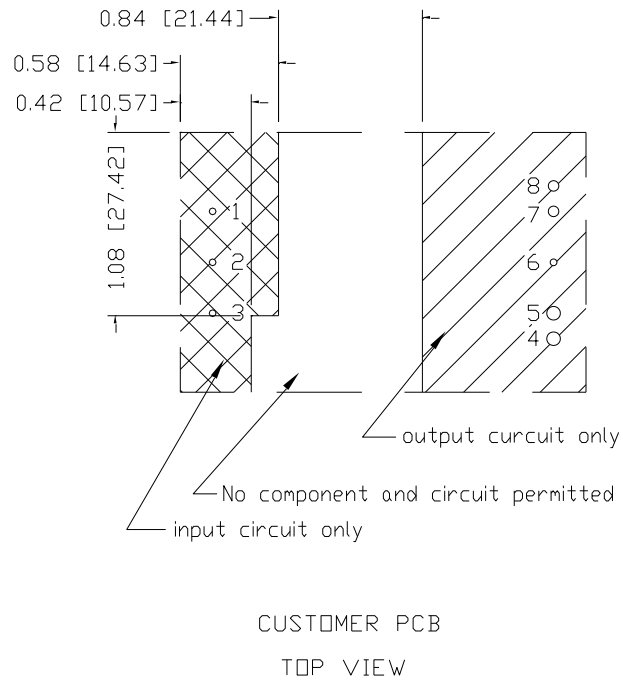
ORQB-X0S10x Recommended pad layout for customer PCB
